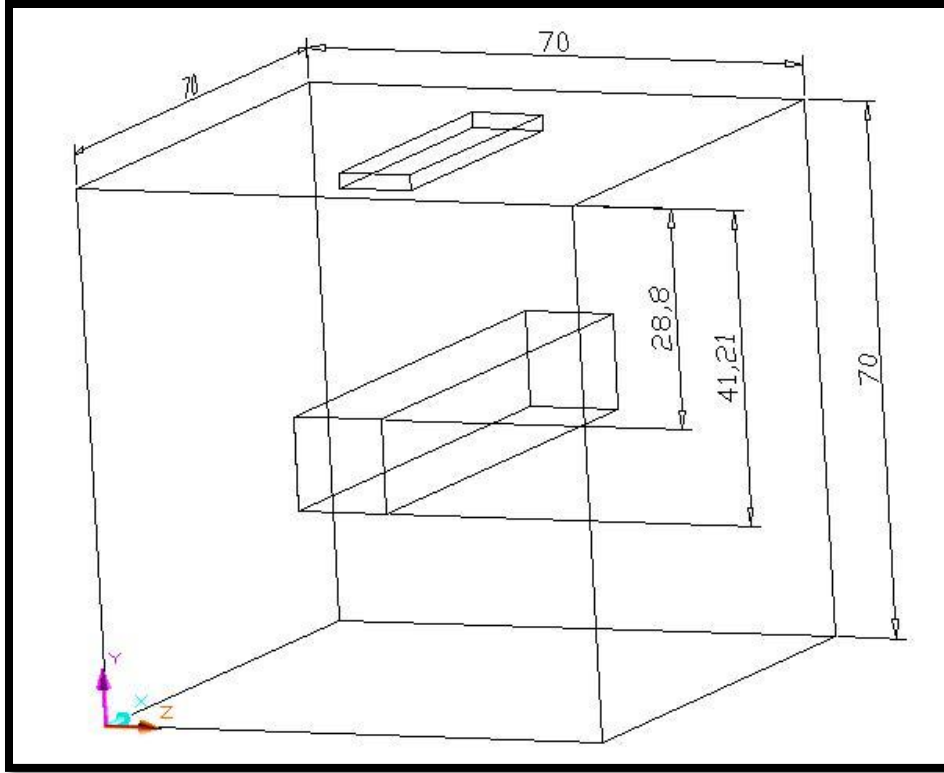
3D view for Dimension of Square shape cross-sectional cooling channels
